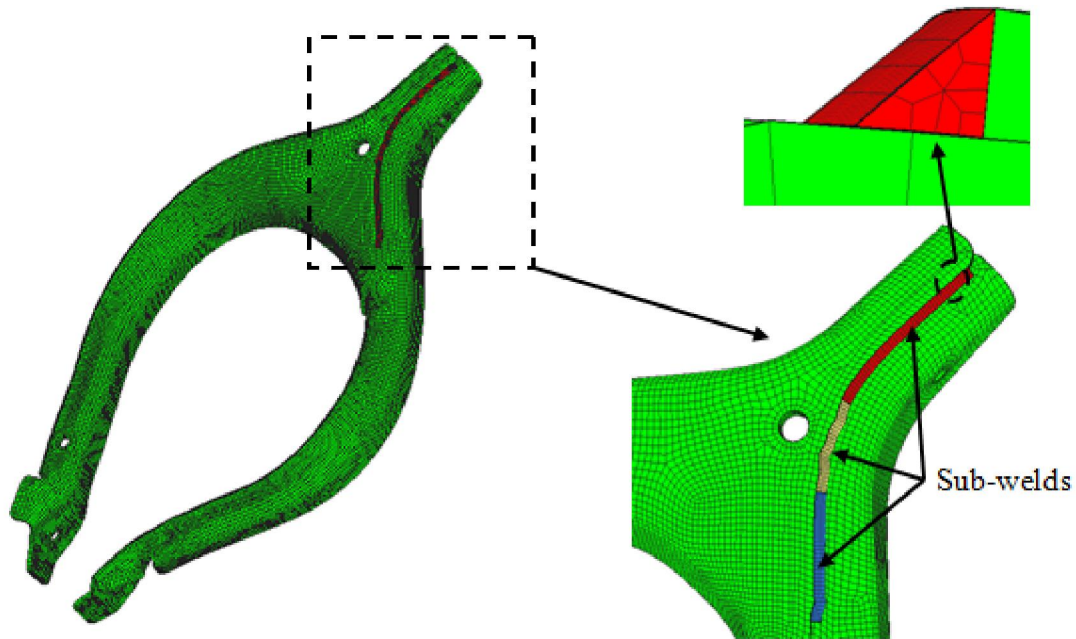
FE model of the lower arm specimen and zoomed view of weld bead
